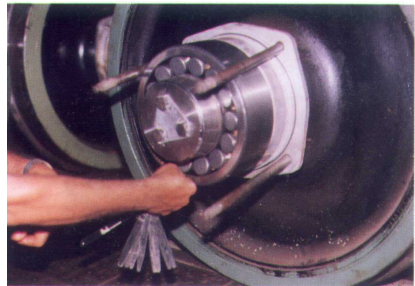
Checking Bearing radial clearance in mounted condition
